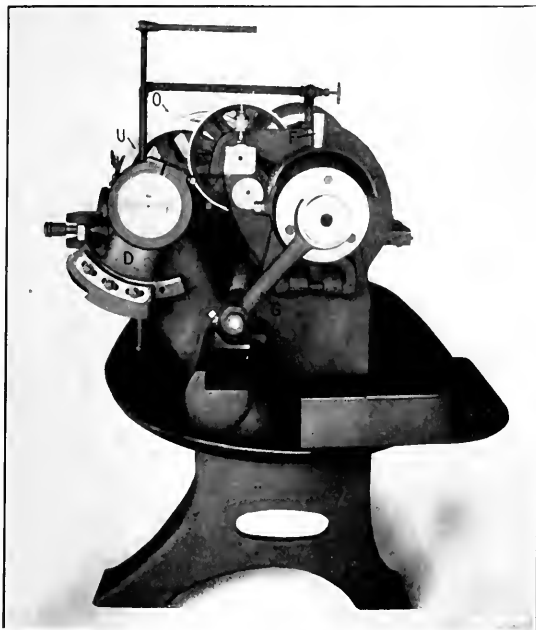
End View of Cleveland Automatic showing Chuck Closing and Stock Feeding Mechanism
